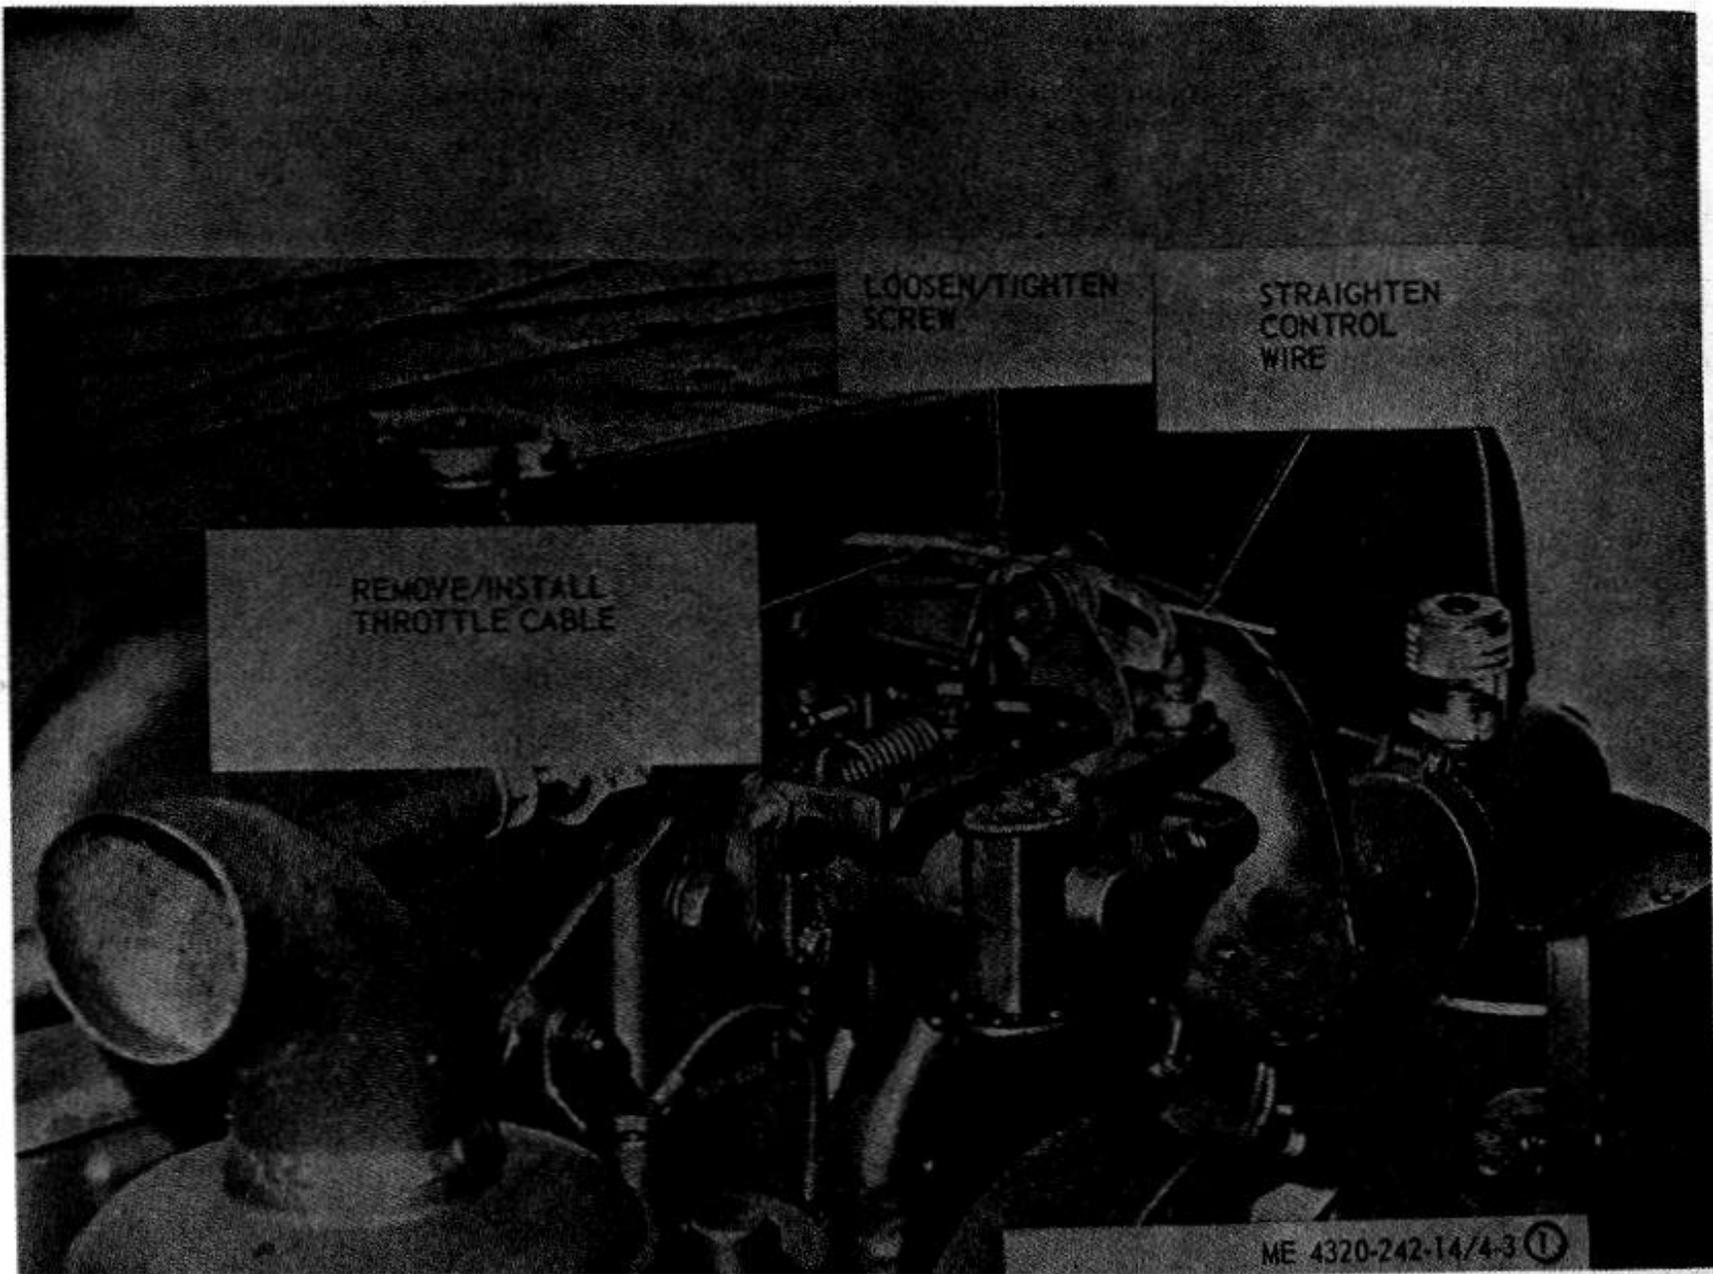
Throttle cable, removal and installation. (Sheet 1 of 2).
